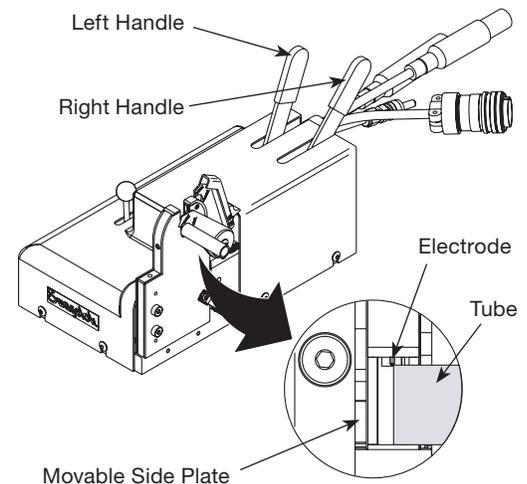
Aligning the Electrode with the Tube End and Clamping the First Work Piece
